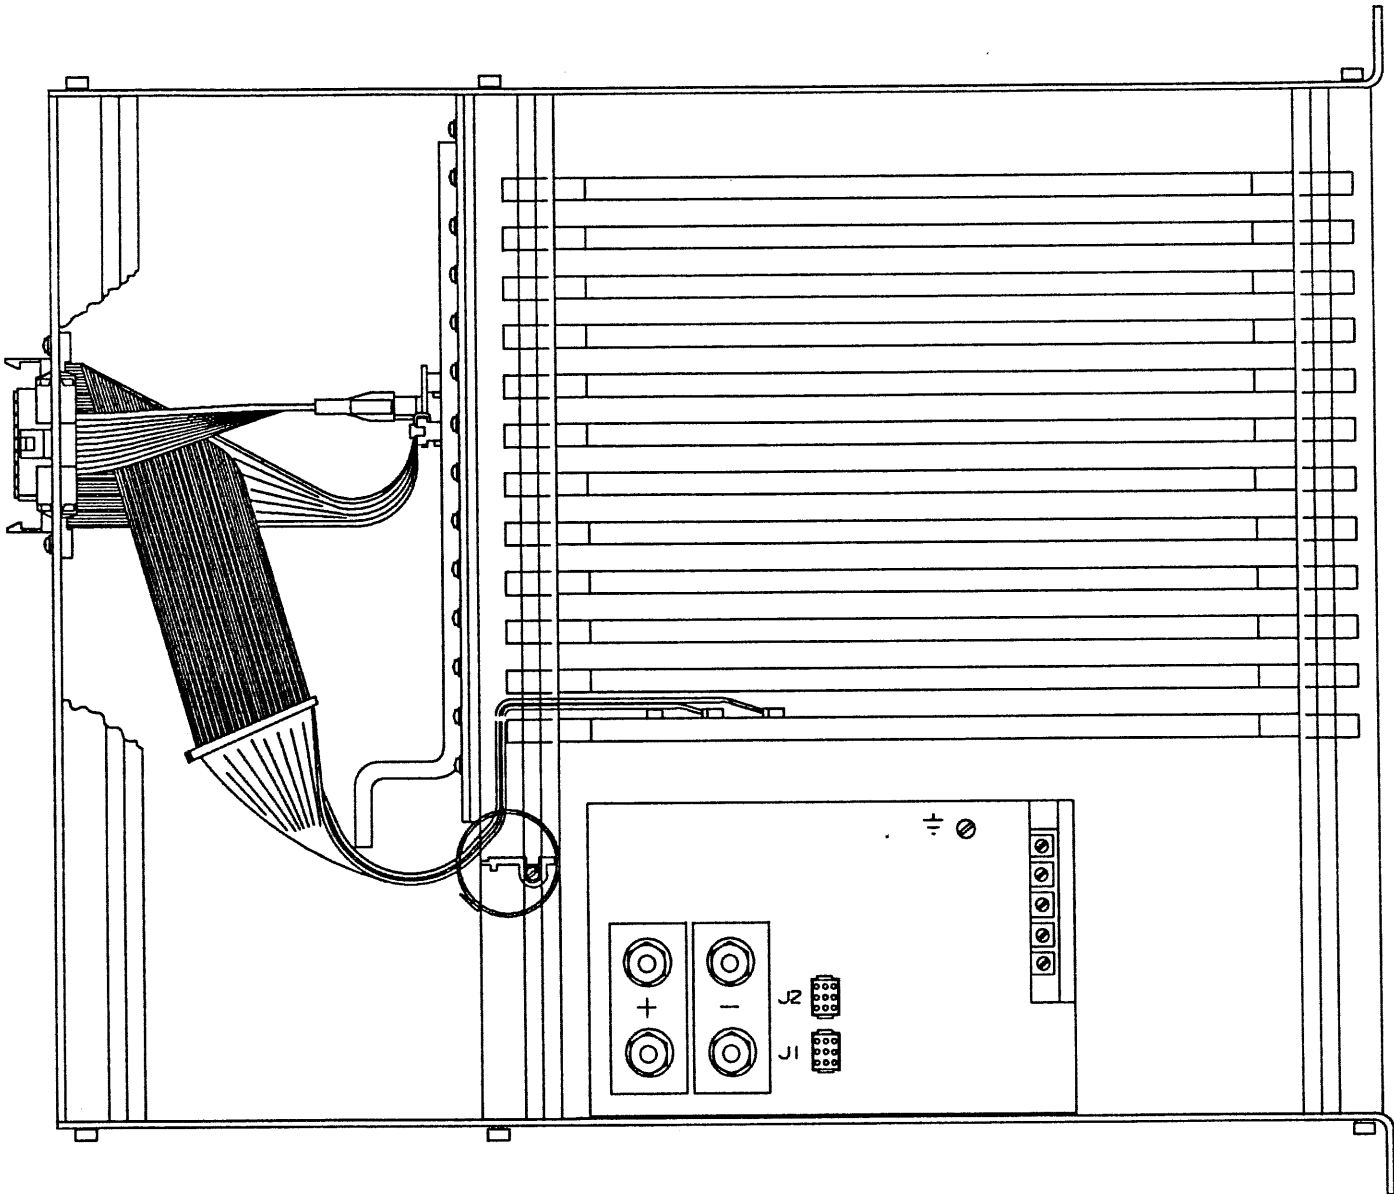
120TX/T 9U Chassis Cable Location
